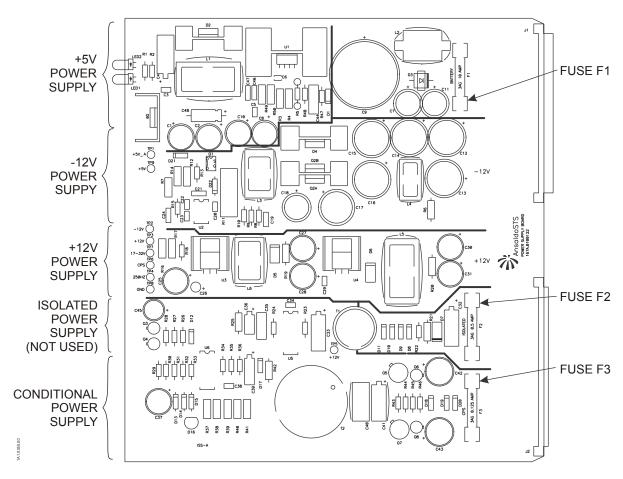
Power Supply PCB Layout (P20B.0100038)
